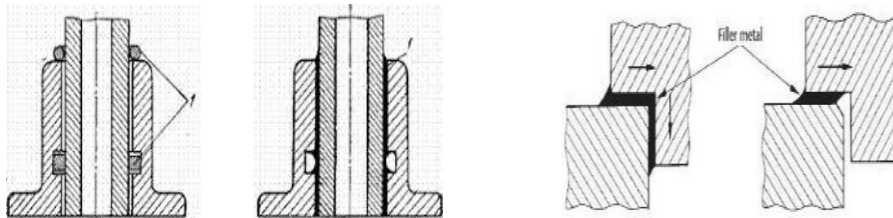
Few examples of design and good wettability; round and square shape of filler metal
